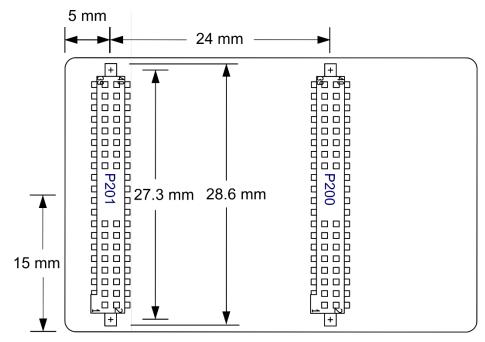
EM3598 Radio Board (BRD4601A Rev. A03) bottom view
